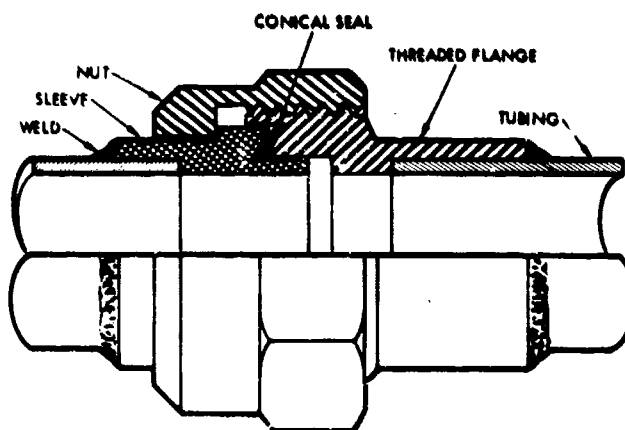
Aeroquip Marman Conoseal Connector, Showing Tube-to-Tube Connection
